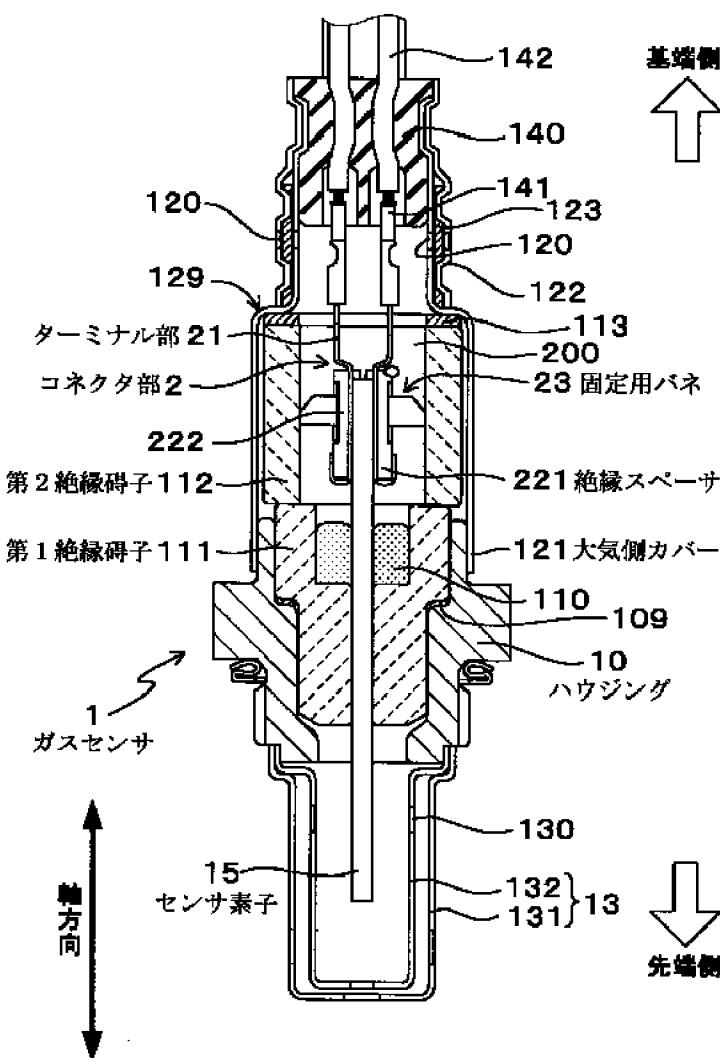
The cross-sectional explanatory view of a gas sensor in the example 2 of an embodiment.
